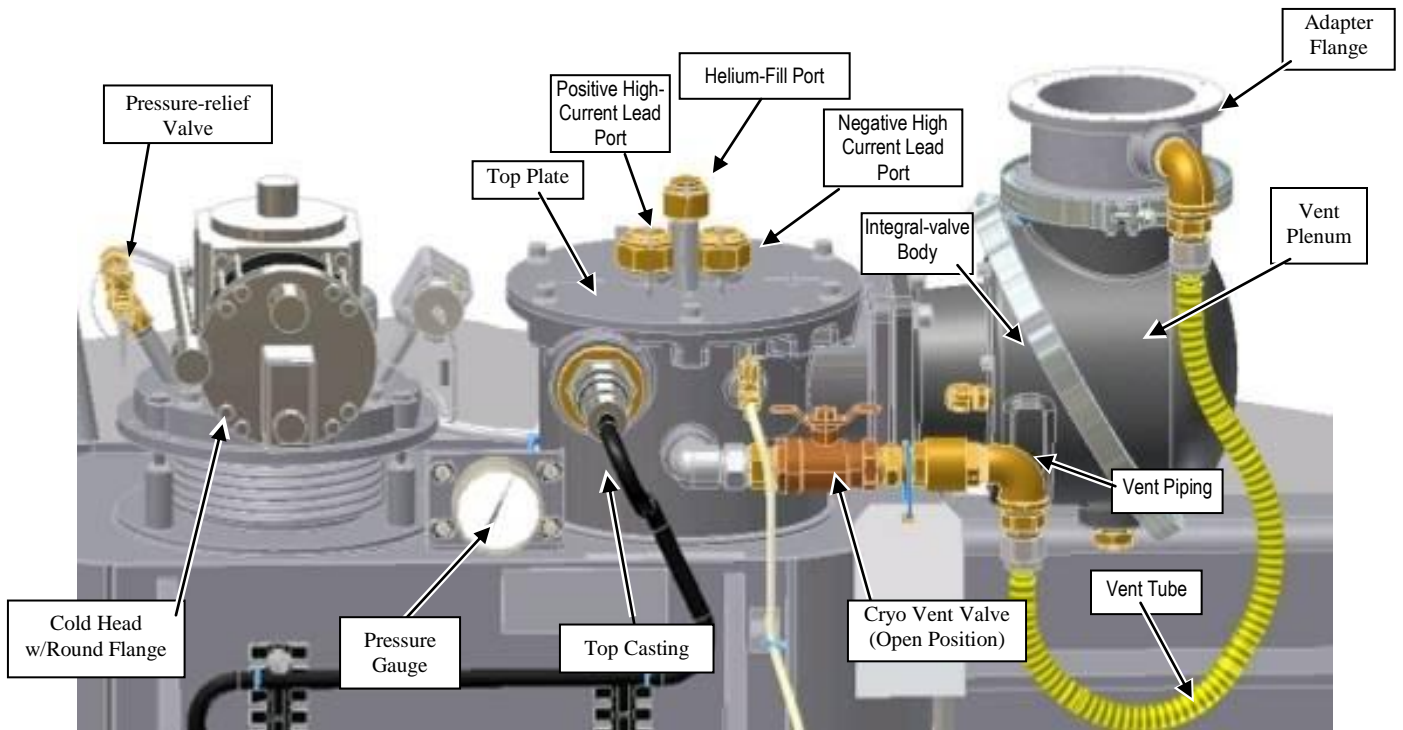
HFO-Y Magnet Top Assembly (with Integral Valve)
